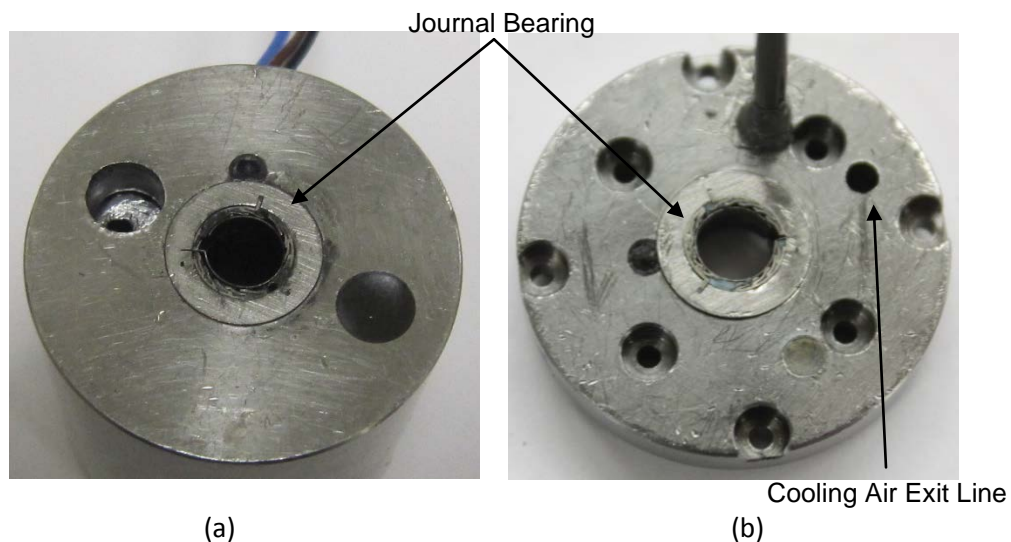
Bearing installation inside the bearing housing of the motor, (a) Impeller side, (b) Motor Cover side
